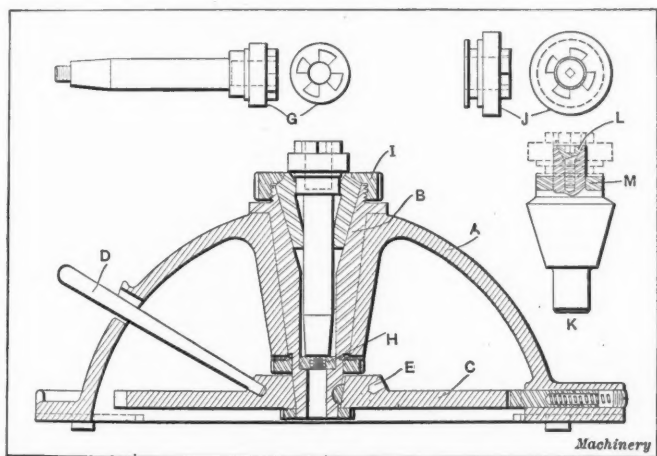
Cross-sectional View of Fixture for milling Clutches and Details of Work-holding Mandrels
